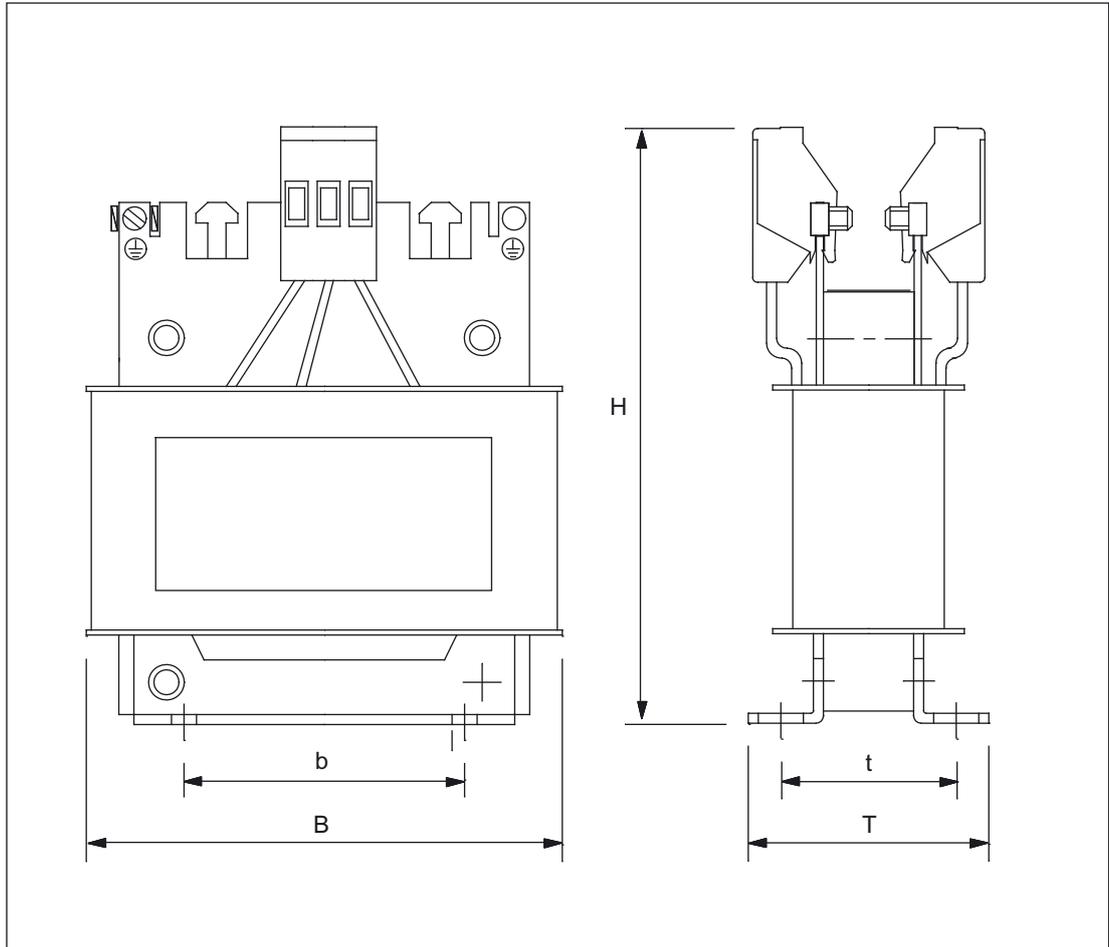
Dimension drawing: line reactor for Smart Line Modules (5 and 10 kW)
